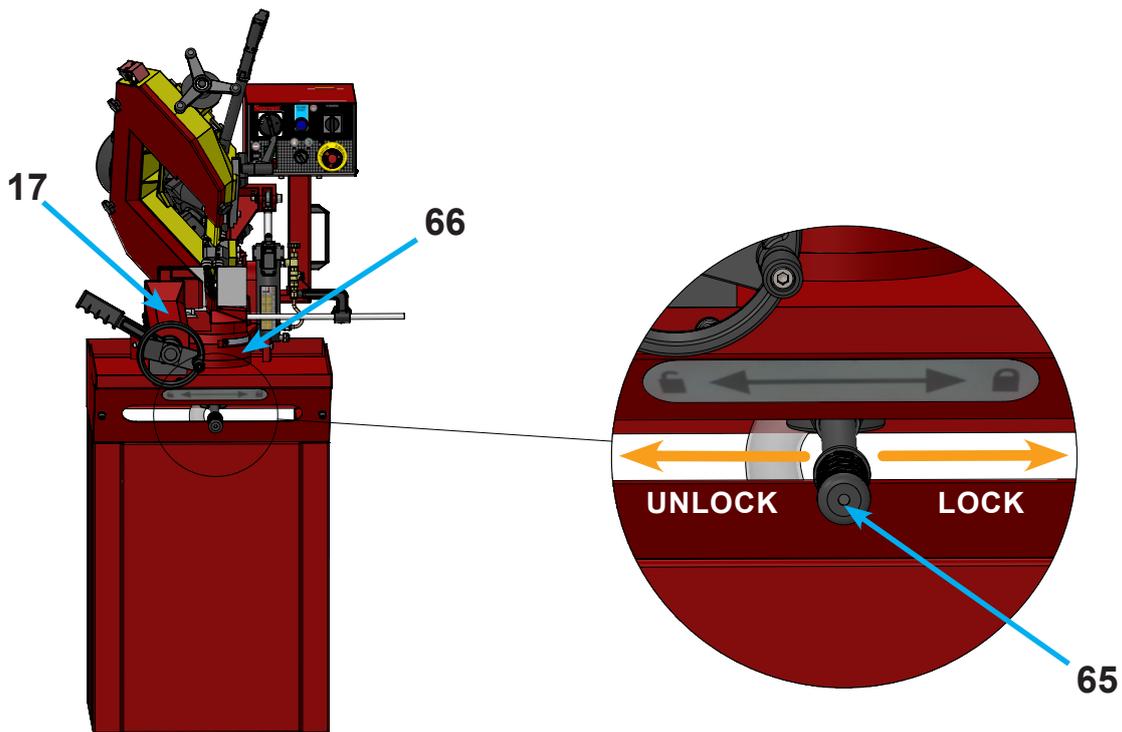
BOW SWITCH LOCK LEVER AND BOW POSITION FOR 0° CUTTING
